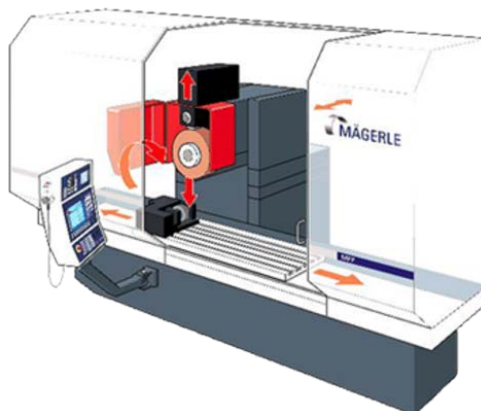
3: Flat grinding machine (Maegerle, 2014)
